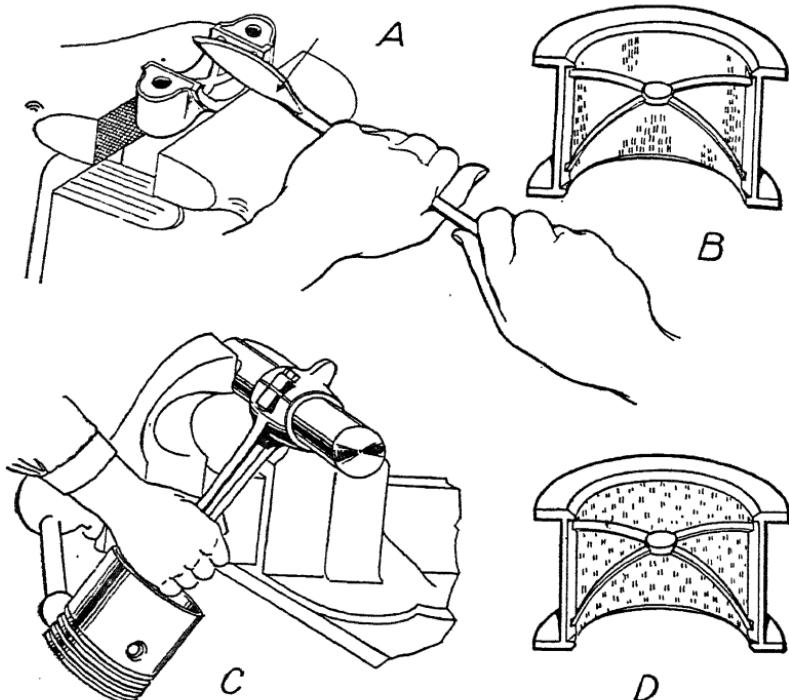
A—Method of Scraping Rod-Bearing Cap
